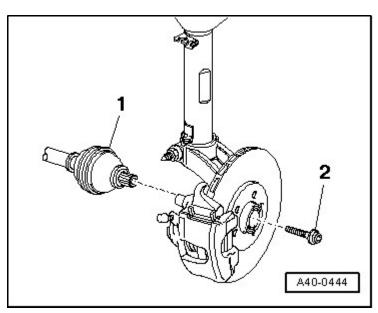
Identifying Collar Bolt For Left/Right Drive Axle Courtesy of AUDI OF AMERICA, LLC
